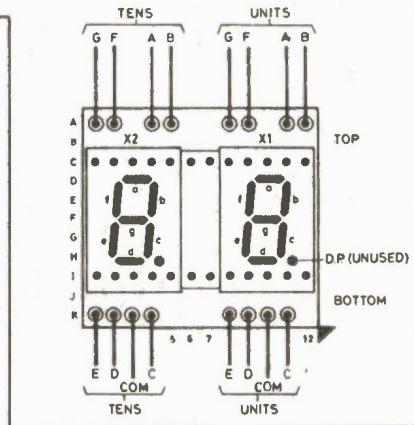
Constructional details of the display board assembly including Veroboard layout and track cutting details.
